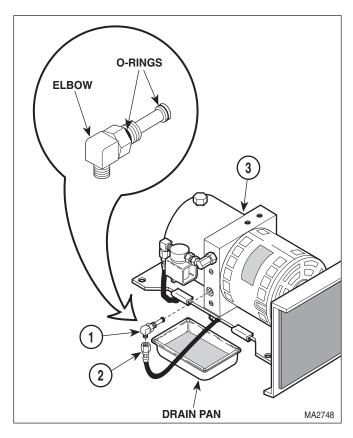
Up Functions Shuttle Valve Removal / Installation
